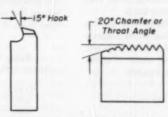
Angles for Insert Chasers Used on Stainless Steel
